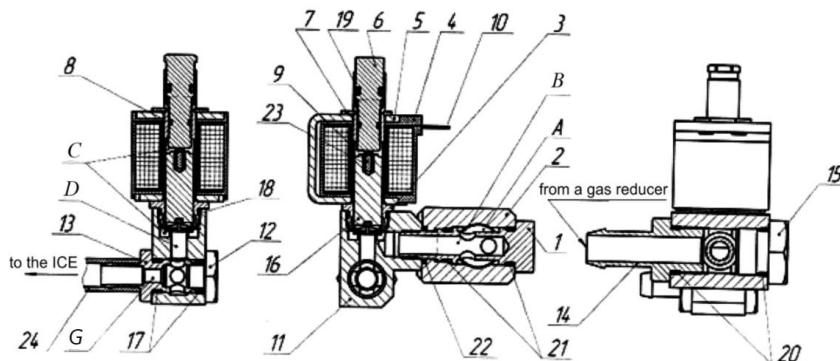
Longitudinal and cross section of EGD for engine 6CHGN13/14 power supply systems: 1 - mounting screw; 2 - gas ramp; 3 - valve body; 4 - coil of the electromagnet; 5 - bracket; 6 - adjusting screw; 7 - lock washer; 8 - bracket; 9, 23 - locking springs; 10 - contact terminals; 11 - the dispenser housing; 12 - plug; 13 - flow nozzle; 14 - fitting; 15 - stop plug; 16 - the core; 19 - the body of the core valve; 20 - rubber sealing rings; 21 - rubber hose; A - cavity in the gas ramp; B - mounting screw; C - cavity above the center; G - flow channel
